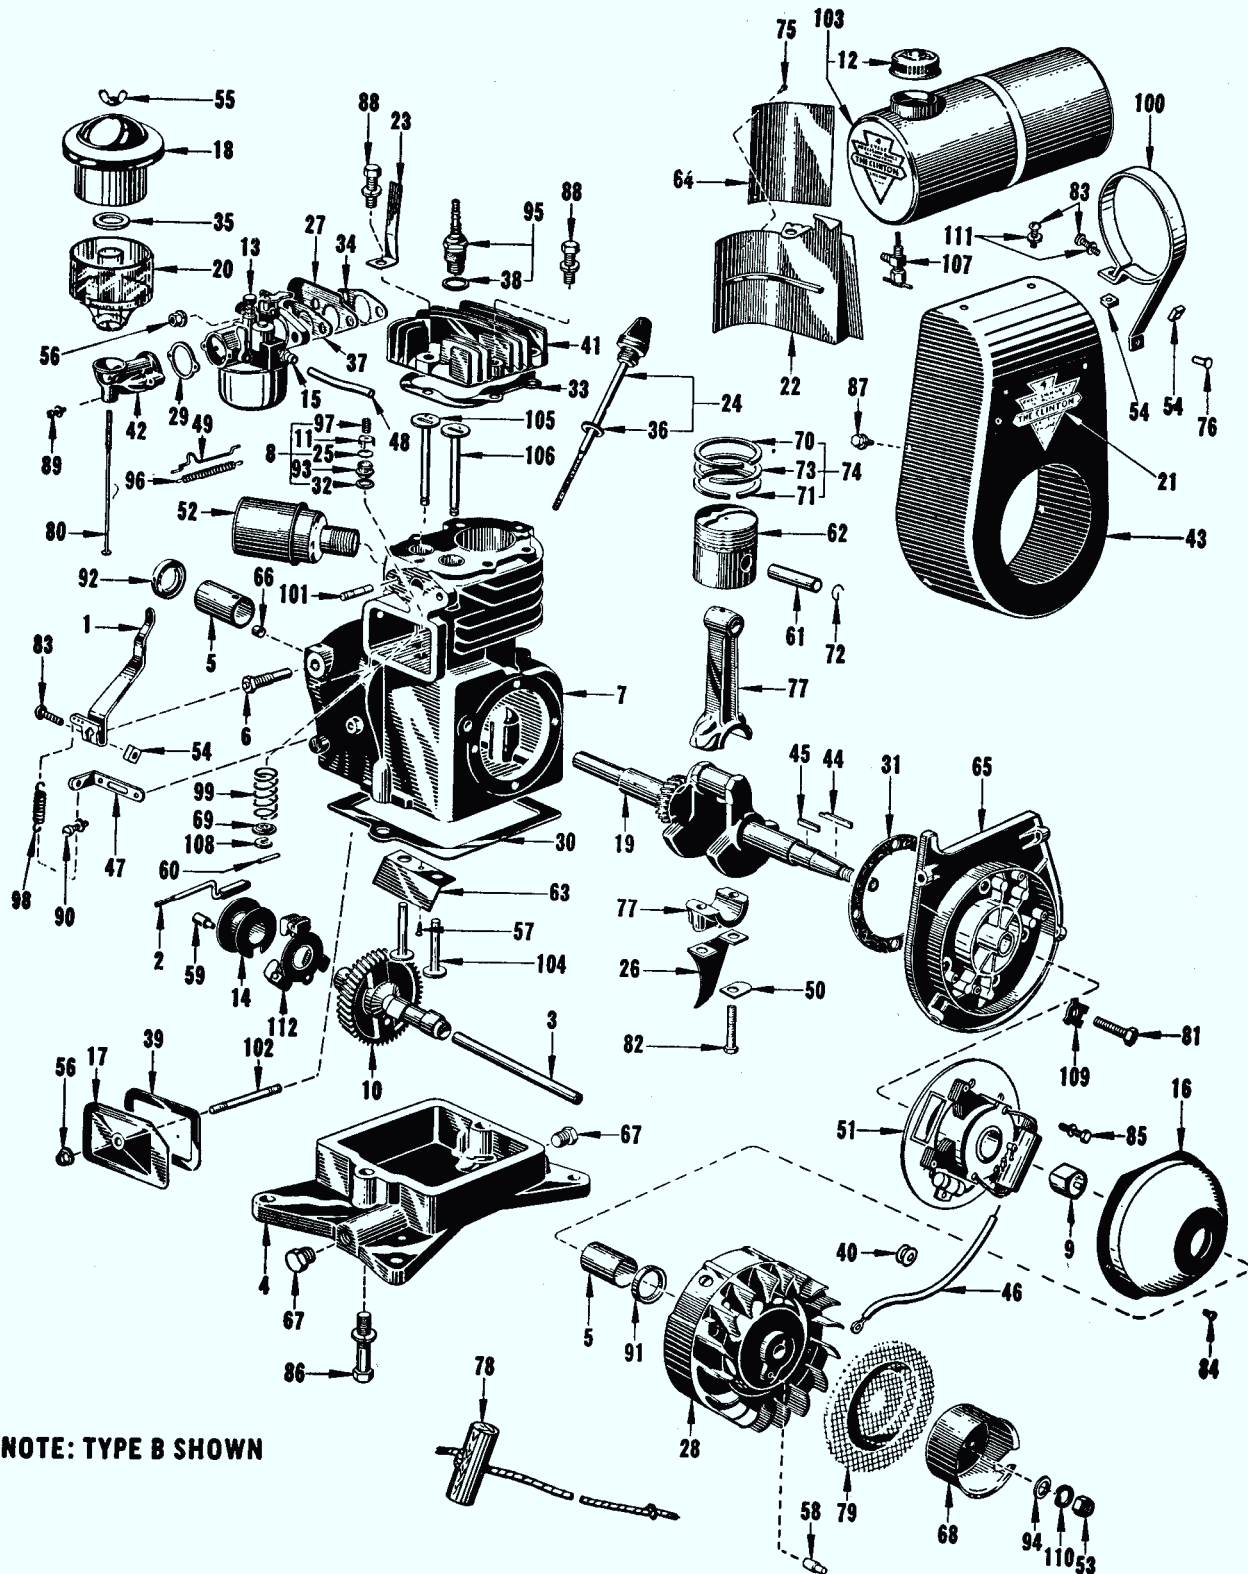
Exploded view of series 700 engine. Early models were equipped with Scintilla magneto (51) as shown.
